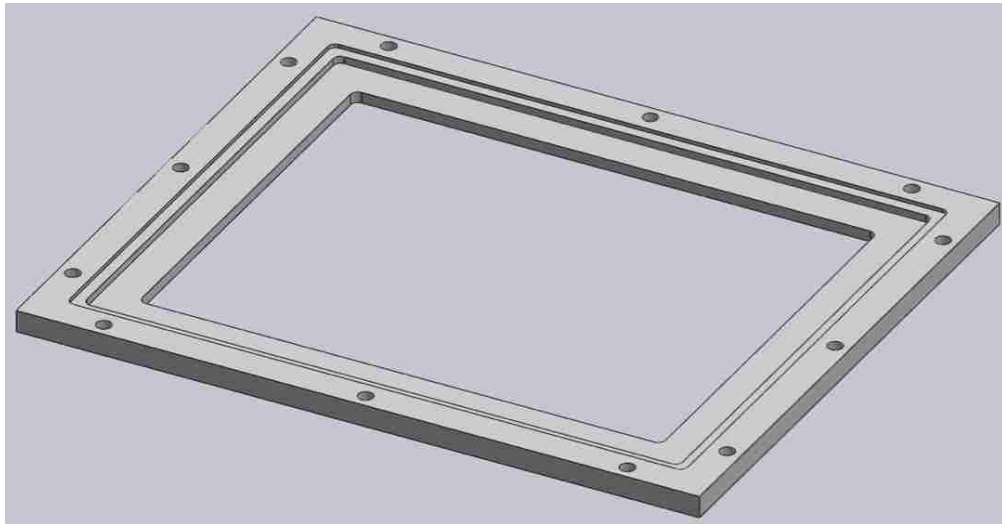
The front of the lightweight mount. This bolts to the back of the lightweight mount to hold mirror in place.
